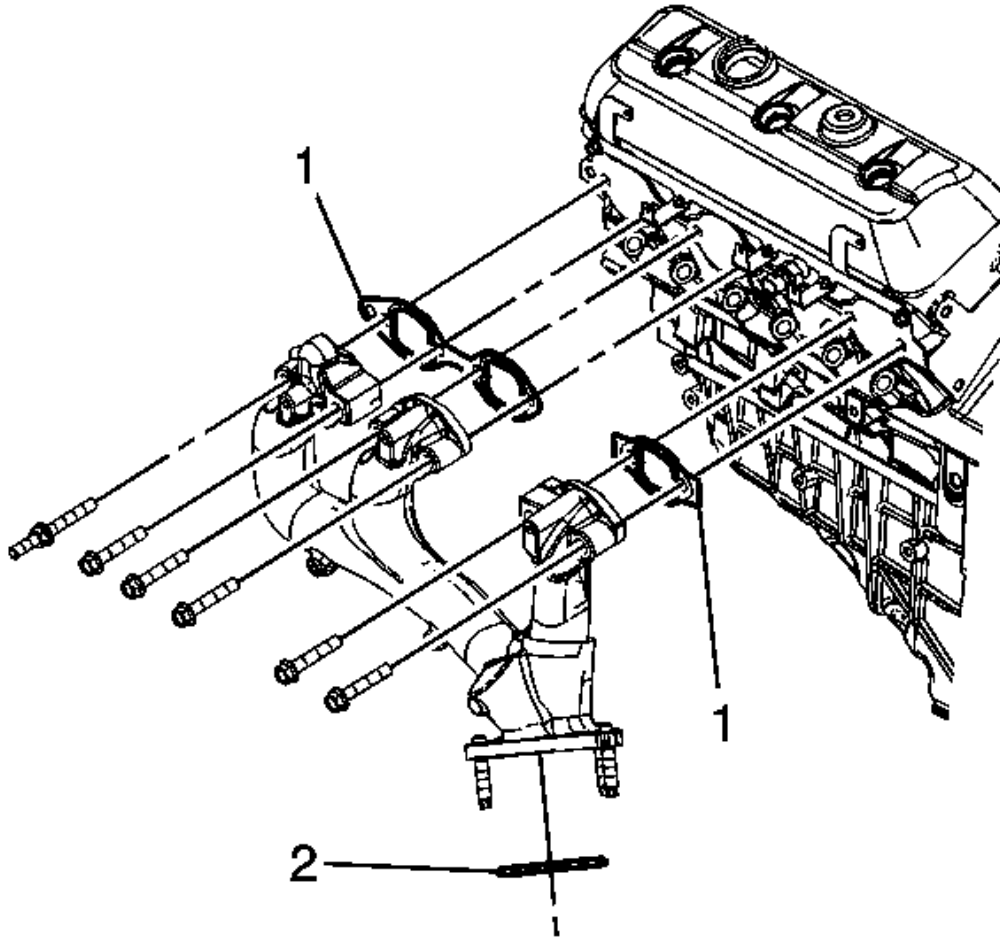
View Of Catalytic Converter Seal & Exhaust Manifold Components
